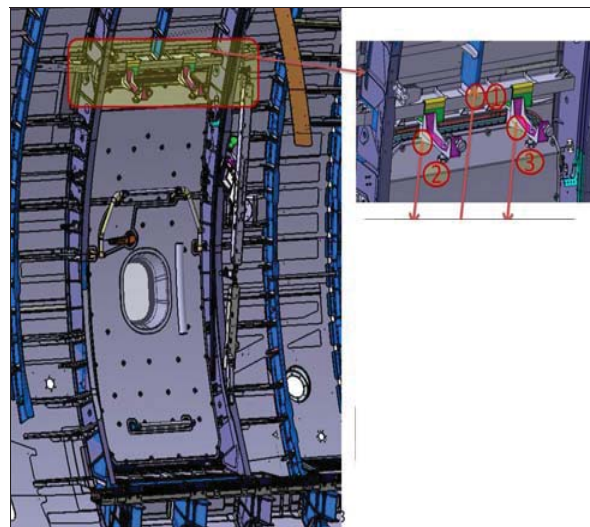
Aircraft panel digital mockup with stringers, brackets, pipes and cable-racks
